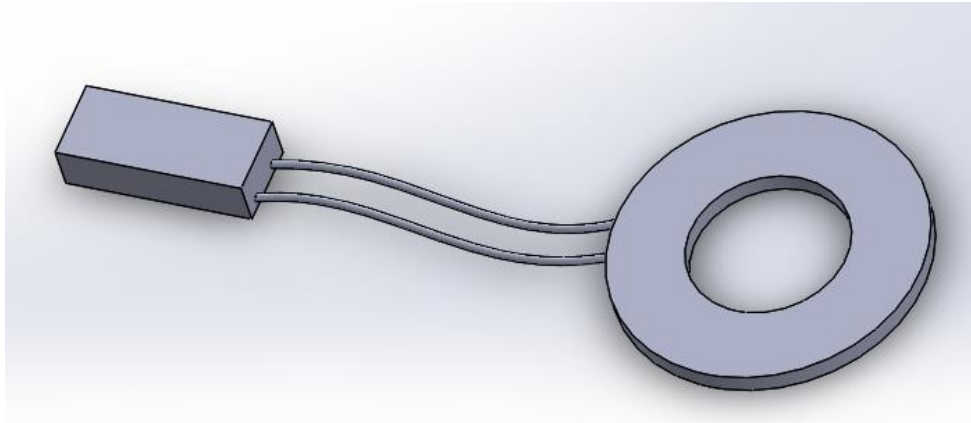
CAD model overview of wireless charging coil receiver with PCB.
